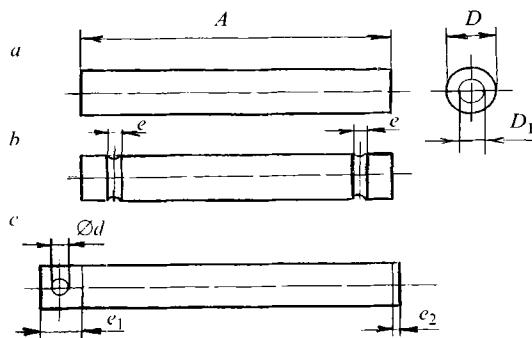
Electroinsulating tubes: a) cylindrical; b) cylindrical with ring grooves; c) preform.
